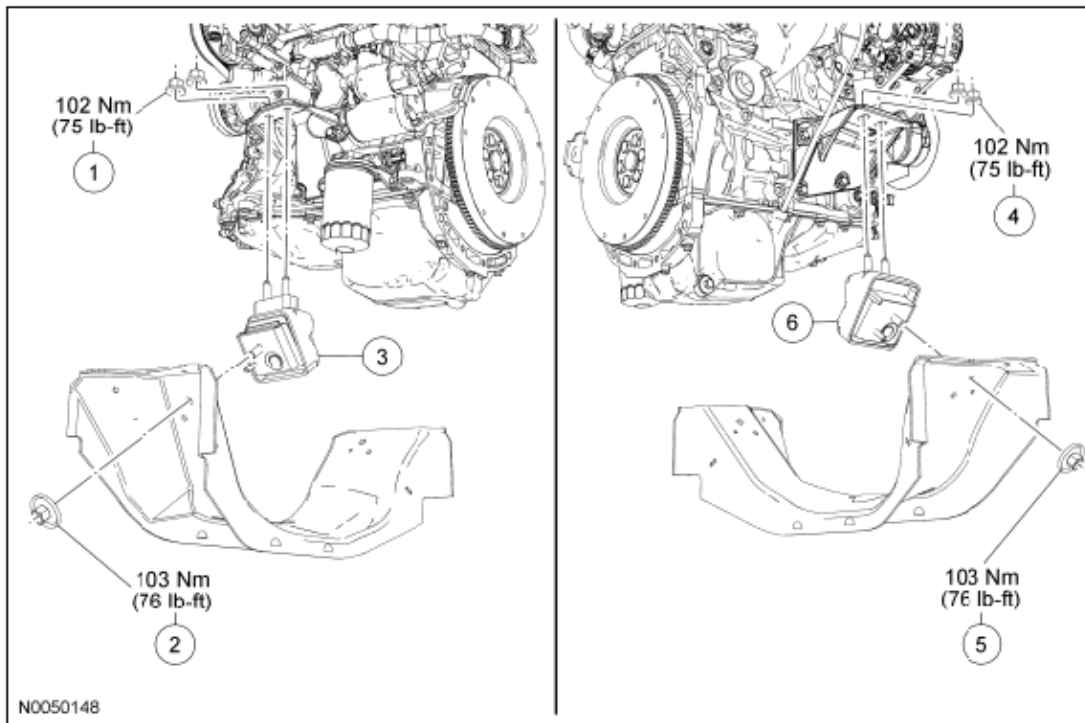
Identifying Engine Support Insulators Components With Torque Specifications
